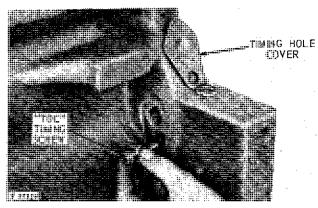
Using Timing Screw to Set Engine at "Top Dead Center"
